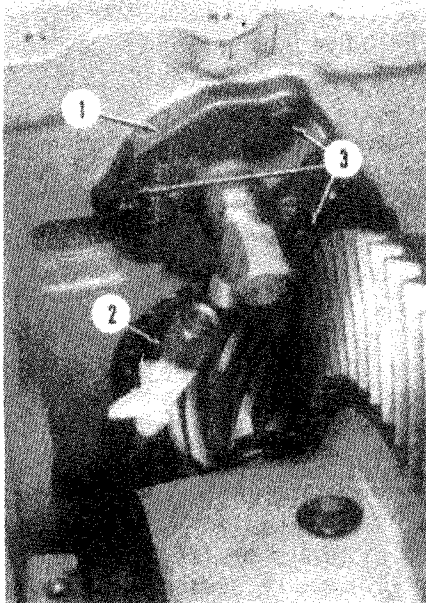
View showing location of C3 oil line and reduction gear shaft bearing retainer. A piece of tape may be wrapped around oil line to prevent the flare nut from sliding to bottom end of oil line when disconnected.
